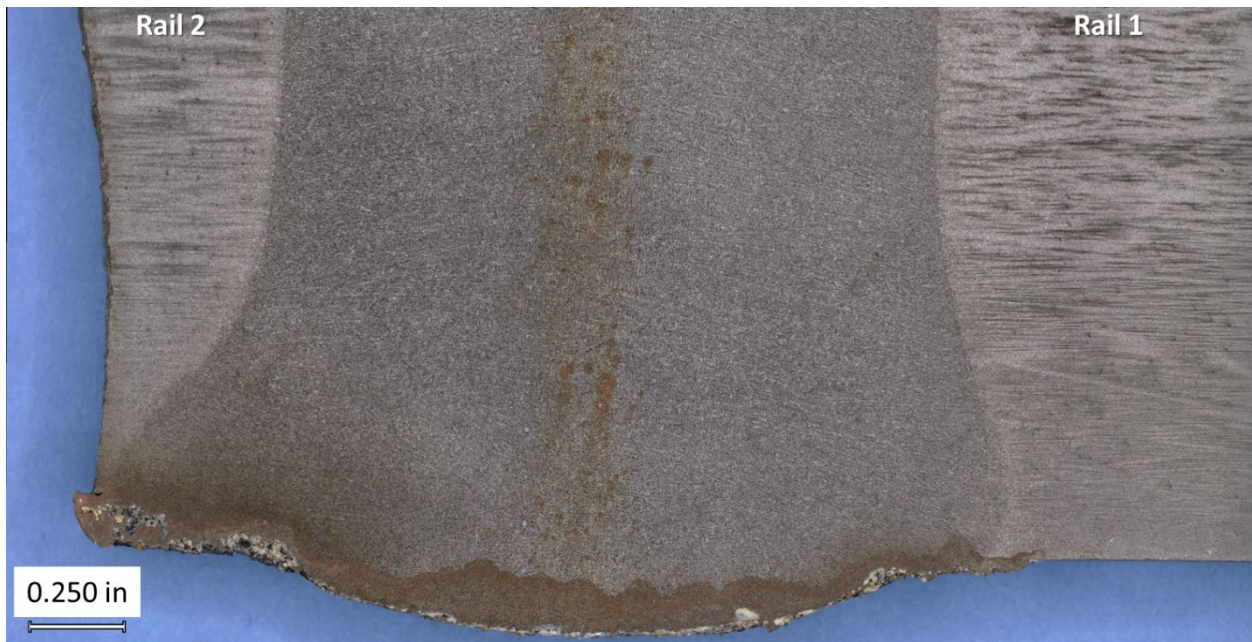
View of the base and lower weld portions in the longitudinal section on the 'A' fracture side.
